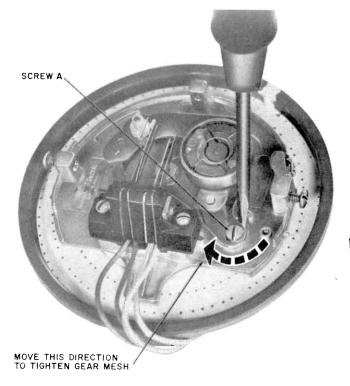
Using Screwdriver to Tighten Gear Mesh
